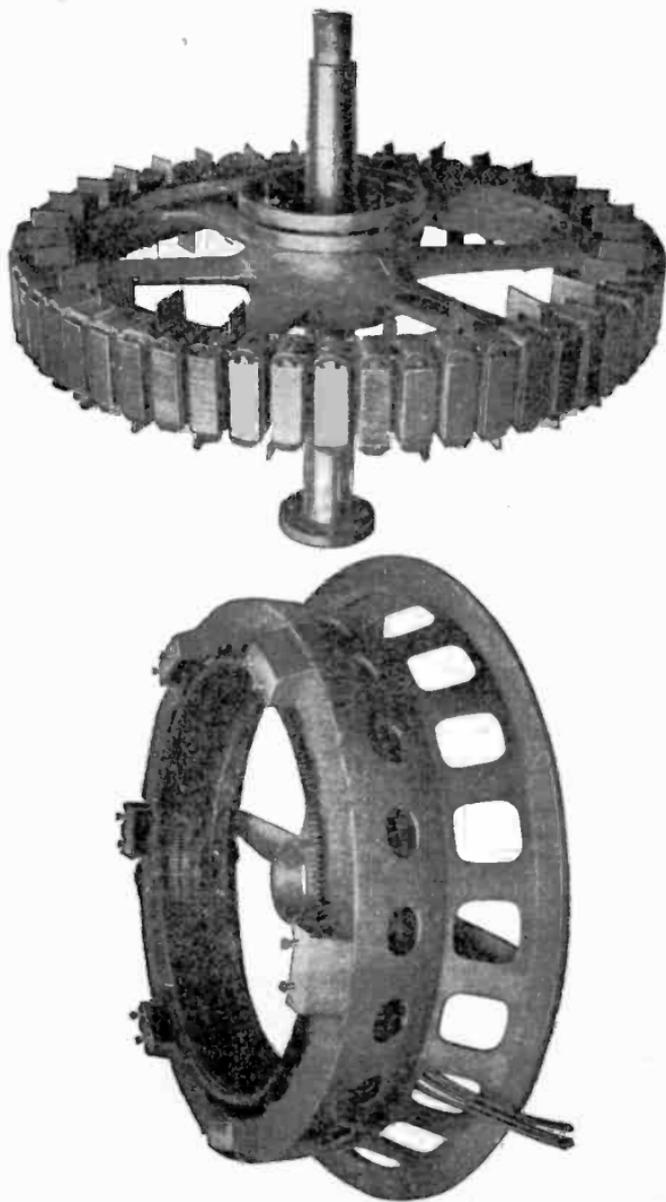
,238.—Westinghouse vertical water wheel alternator armature with armature winding. The frame is of cast iron in which the armature core, built up of annealed and jappanned sheet steel punchings, is held by dovetail slots. The open type frame and vent ducts in the armature core assure ample ventilation. The armature winding consists of form wound interchangeable coils, insulated with mica over the imbedded portion and has treated cloth tape on the end turns.
